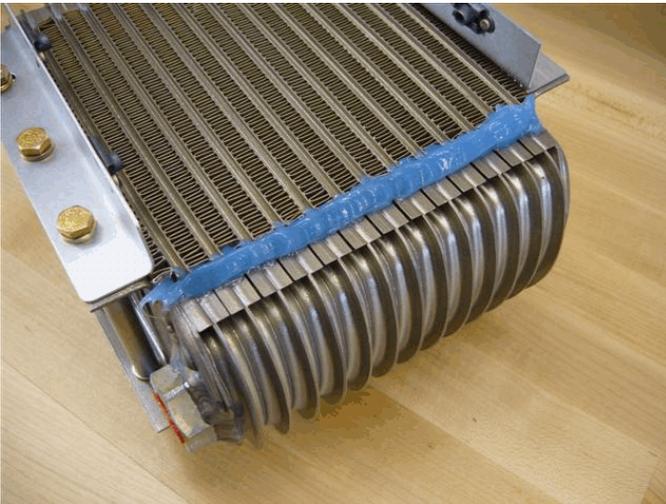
Fill the gap between the fin group and the end tanks with high temp RTV to form a gasket that will seal the bottom of the duct and the air gap completely.
